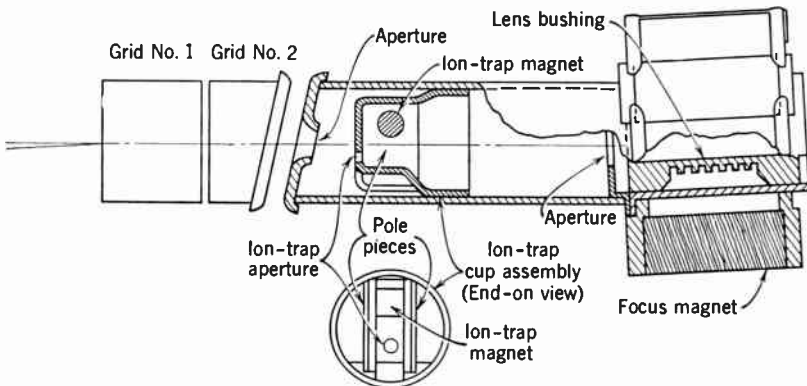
Internal Pole Piece Gun of the General Electric Company.
